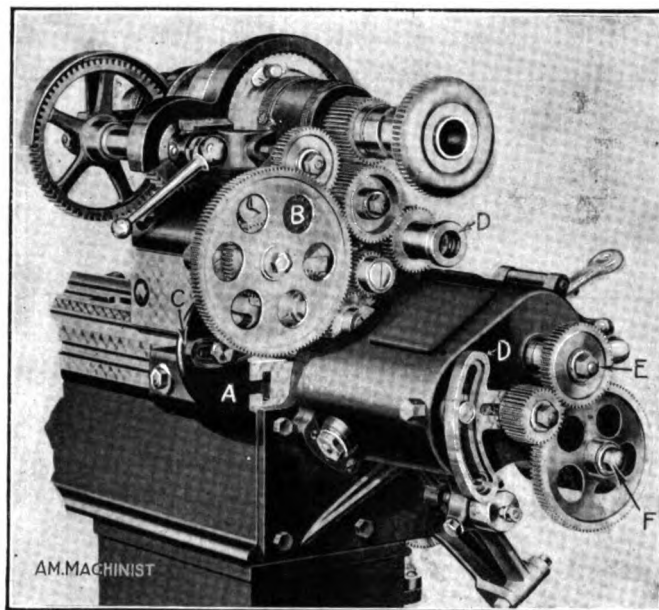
REAR VIEW WITH ELEVATED HEAD
